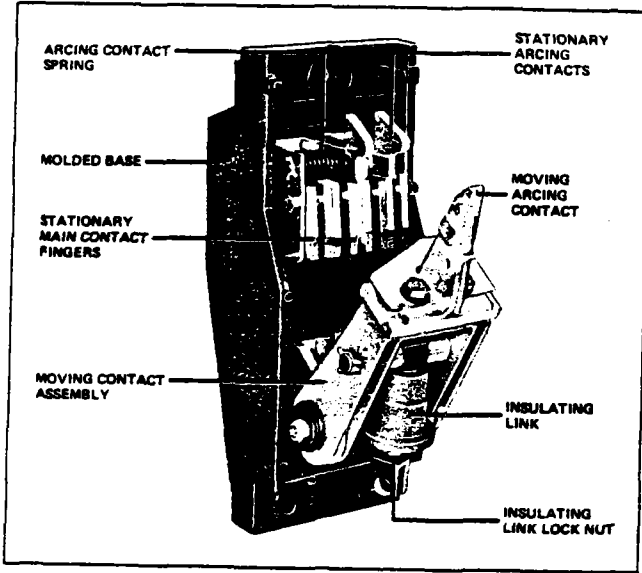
Type DS-416 Pole Unit Assembly - Front View (383420)
